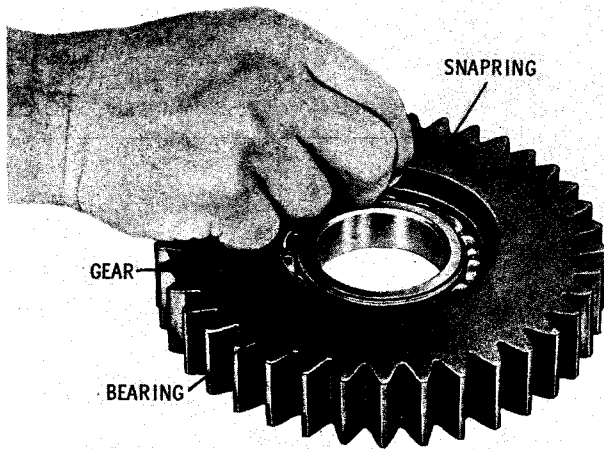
Installing oil pump idler gear (or PTO idler gear) bearing snapping S1704
